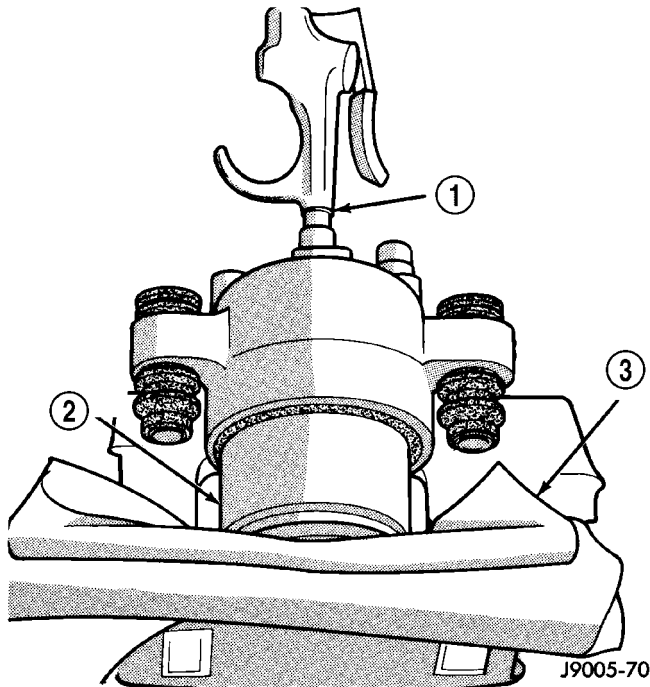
CALIPER PISTON REMOVAL - TYPICAL
